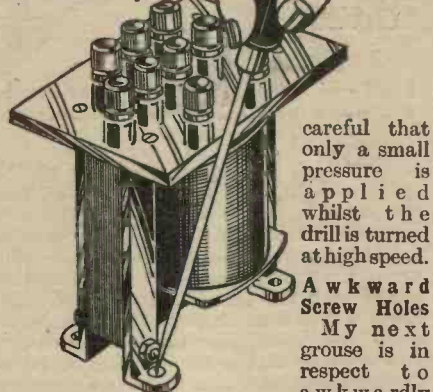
It is impossible to hold the screwdriver upright due to the position of the holes.
